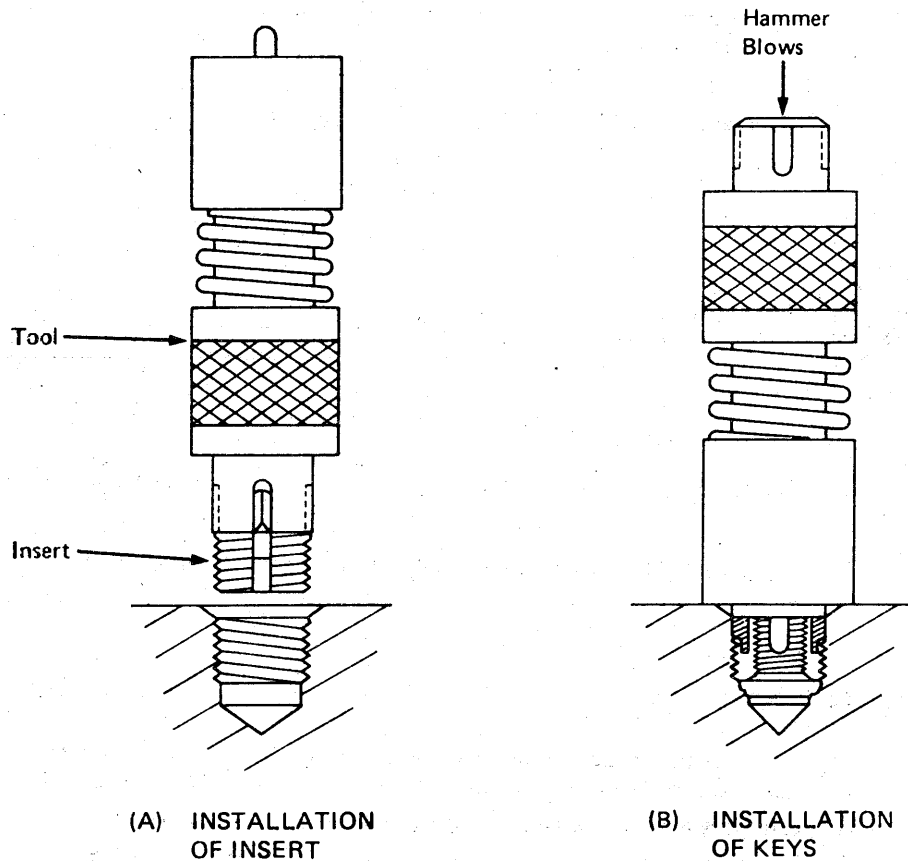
INSTALLATION TOOL (KEY-LOCKED INSERTS)
